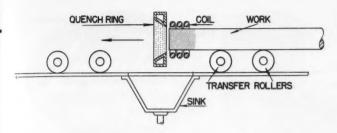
Diagram Illustrating Continuous Hardening Set-Up
